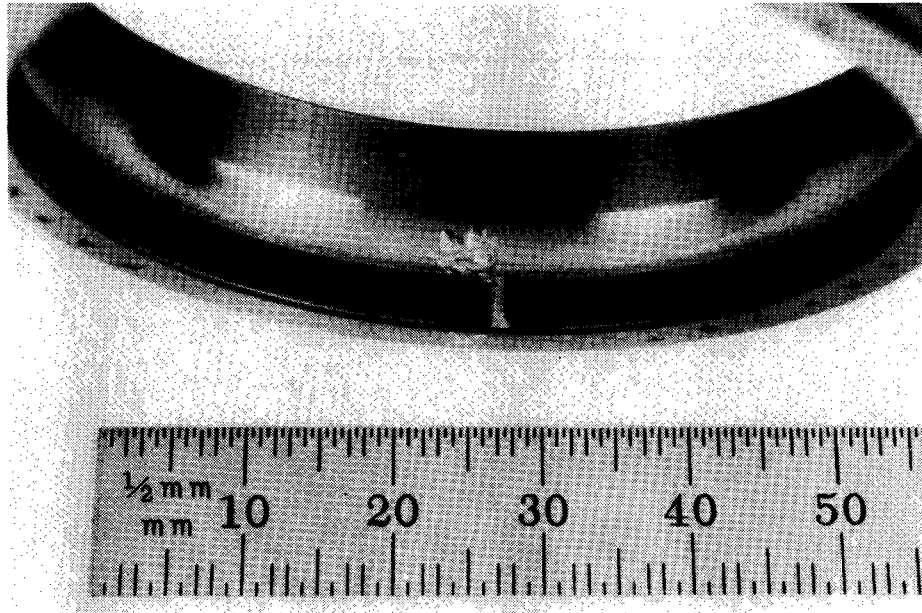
90-Degree Gearbox -408 Bearing Outer Race C/D Fault, Runs 2A + 2B
